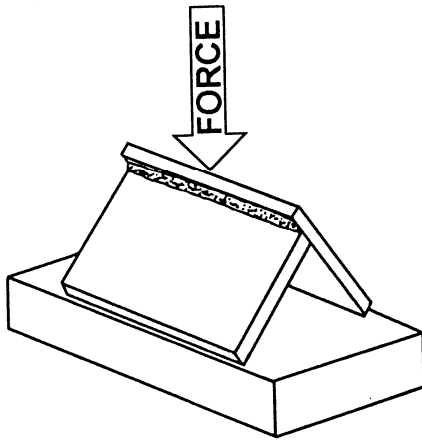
Rupturing fillet weld test plate.
